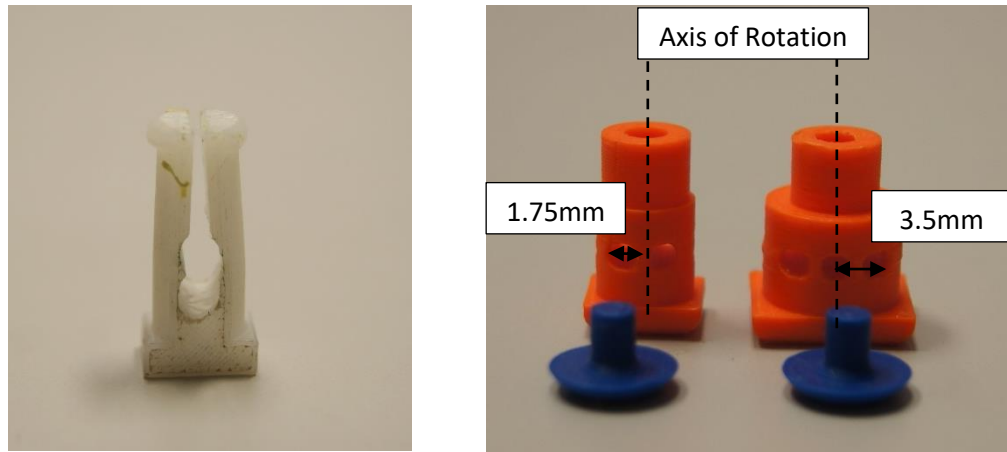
Left – Phoenix Hand Wrist Joint Pin, Right – Designed Wrist Joint Pin and Cap
